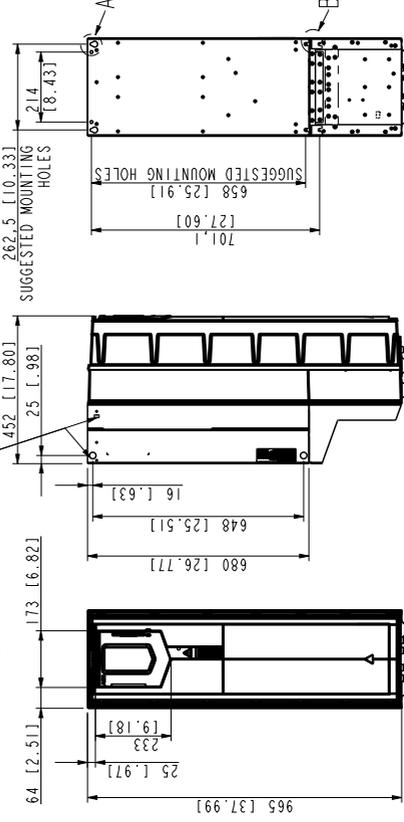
PLATE HOLE $\varnothing 22.5$ [0.89"] (4pcs)
